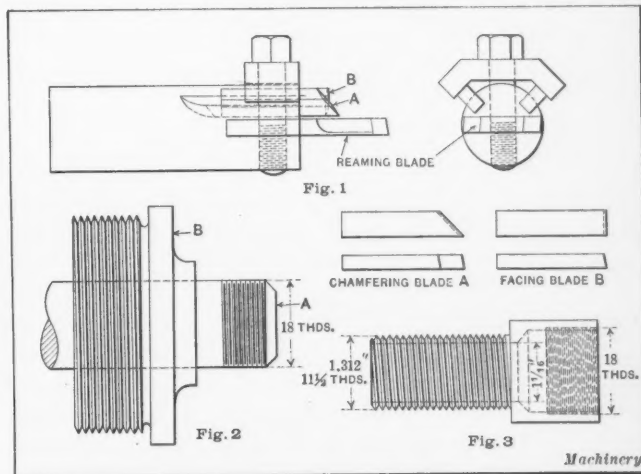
Combination Tool used when making Stuffing Tubes. Fig. 2. Chuck used for holding Work. Fig. 3. Stuffing Tube machined by Tool shown in Fig. 1
